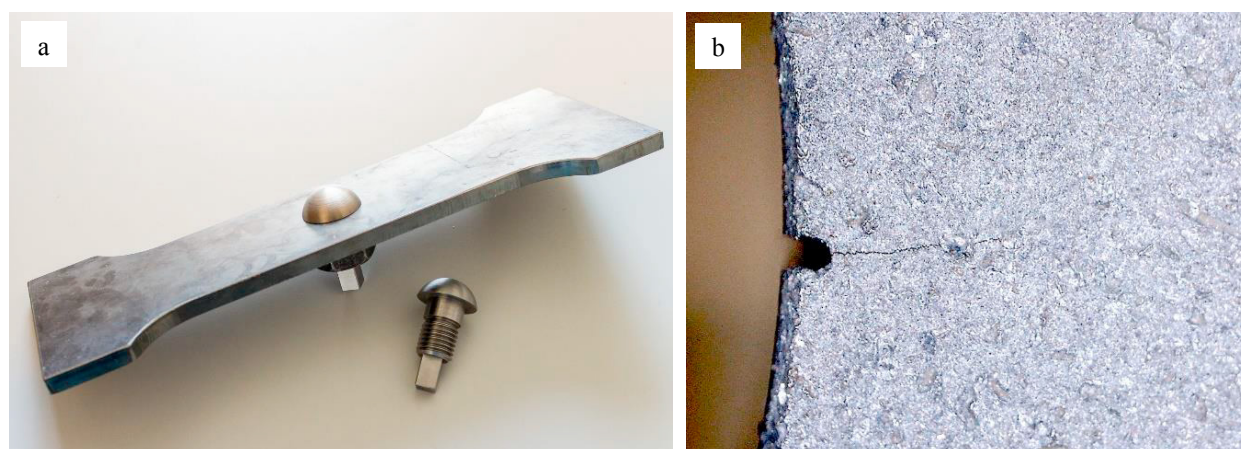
(a) Tension specimen and rivet-like bolts, (b) Initial crack at the notched rivet hole at the front of a specimen.
